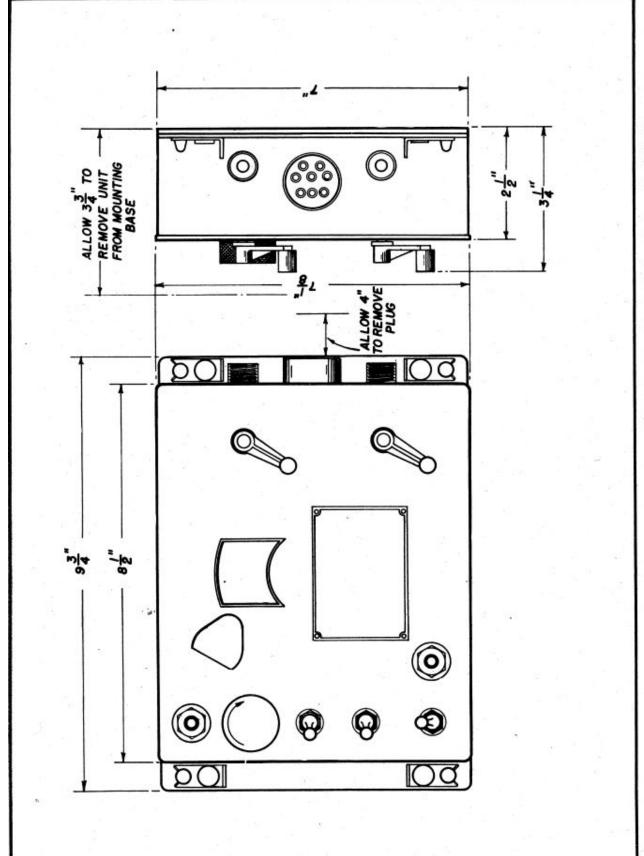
TYPE MR-IB REMOTE CONTROL UNIT OUTLINE DRAWING
